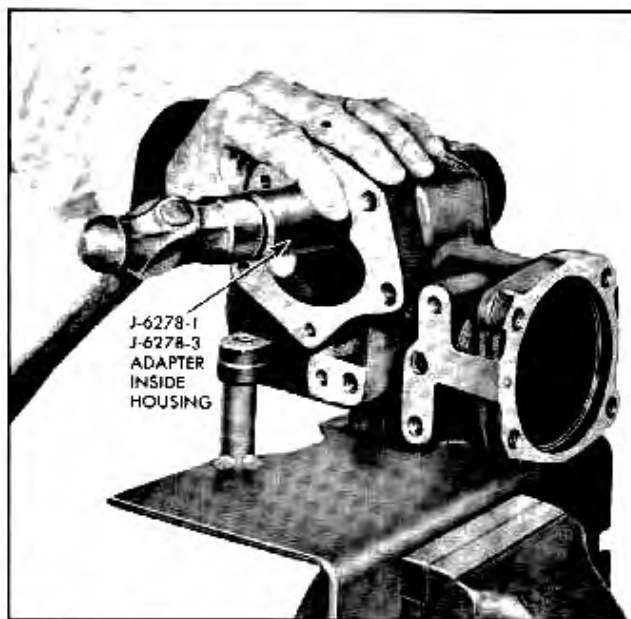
Removing and Replacing Pitman Shaft Needle Bearing
